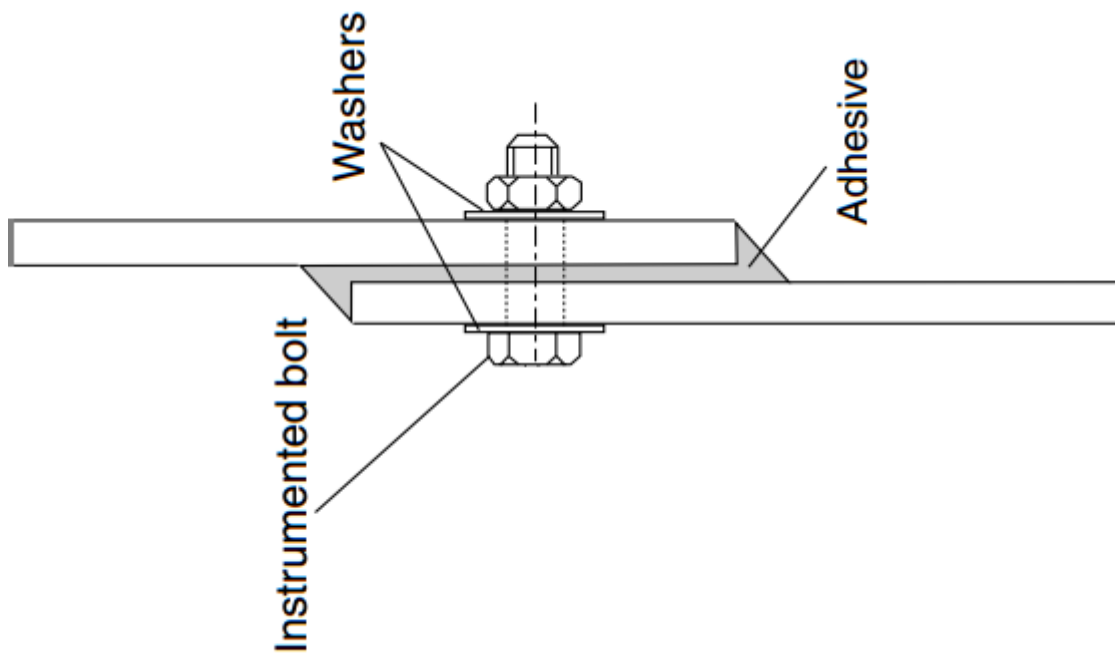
Schematic of a Bolted- Bonded hybrid joint [31].
